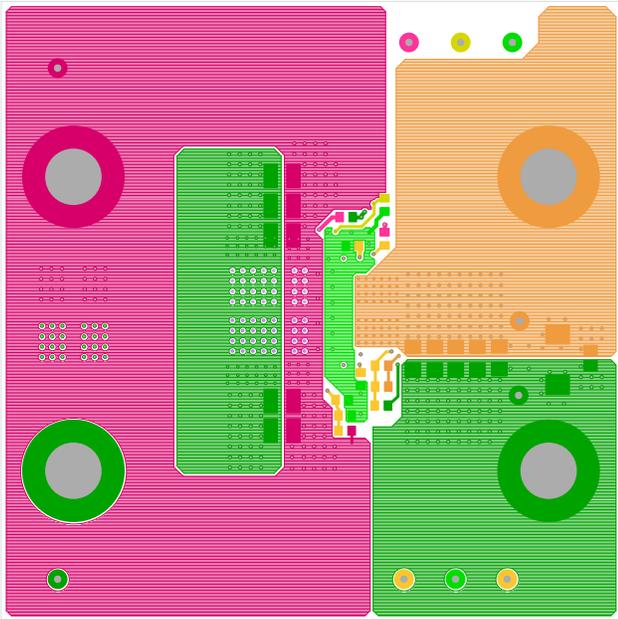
BOTTOM LAYER SOLDER SIDE
